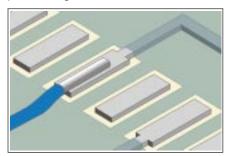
Acceptable* Wire soldered parallel to conductor, contact, SMT pad.
